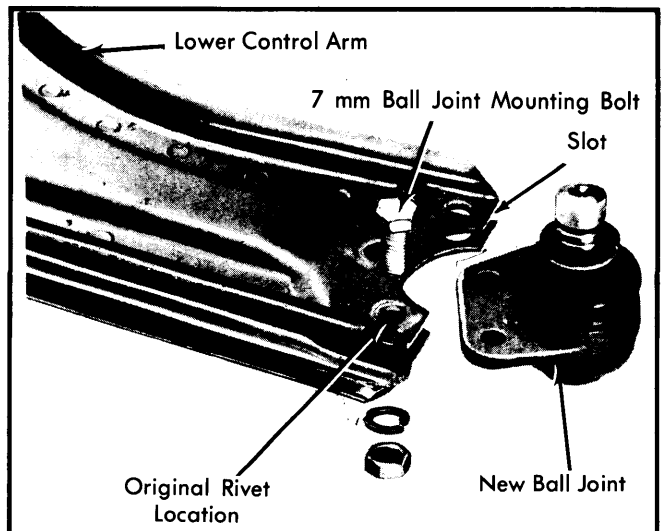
New Ball Joint Installation Location in Lower Control Arm
